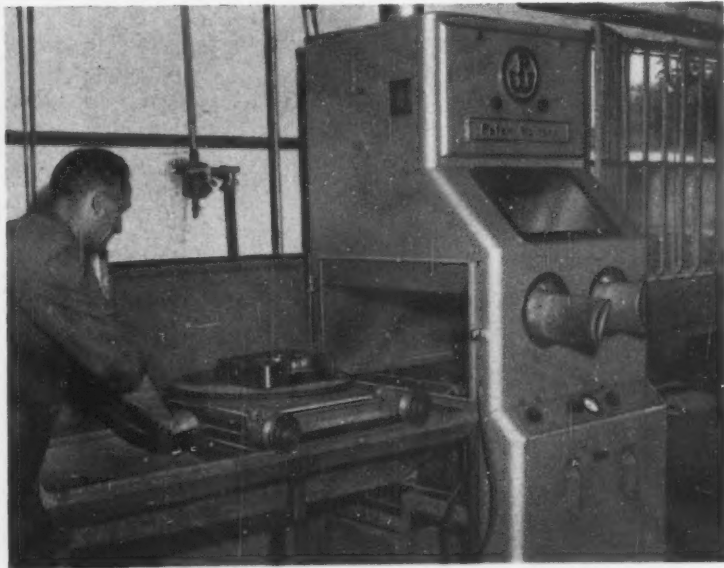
Cavity and Other Die Surfaces are Finished by the Vapour Blasting Process in this Peter Wolters Cabinet, with 400-grit Aluminium Oxide Abrasive
